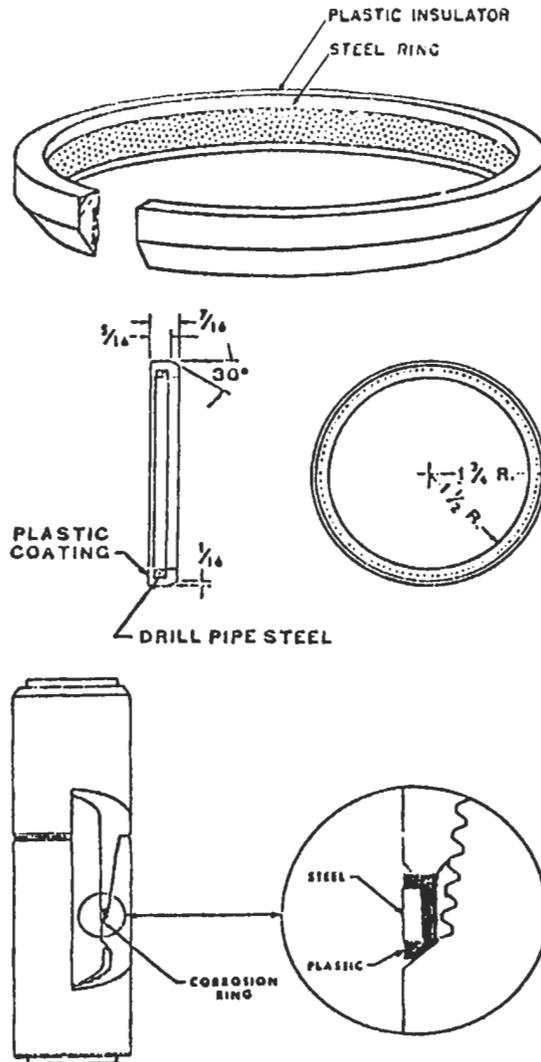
Drillstring corrosion coupon ring. (From Ref. [220].)
